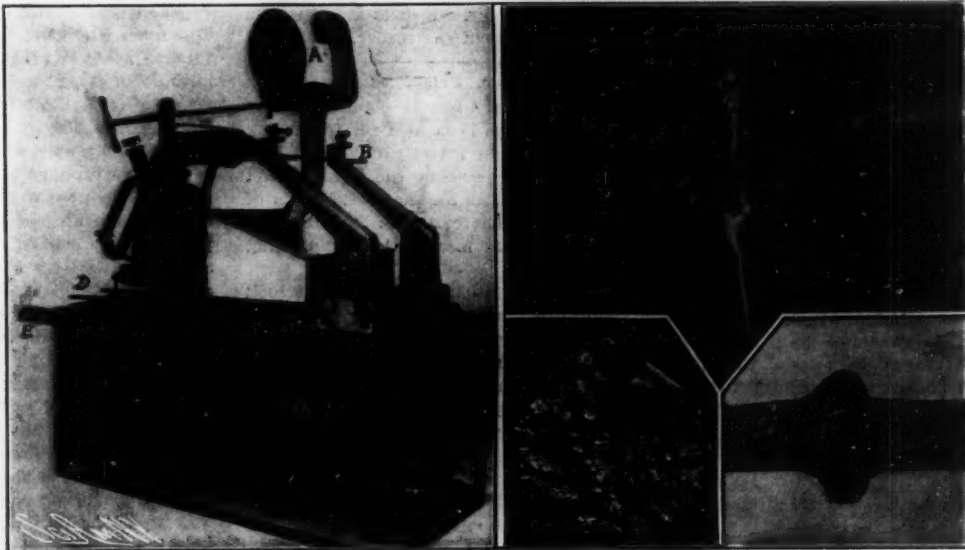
A NEW ALUMINIUM WELDING MACHINE.
